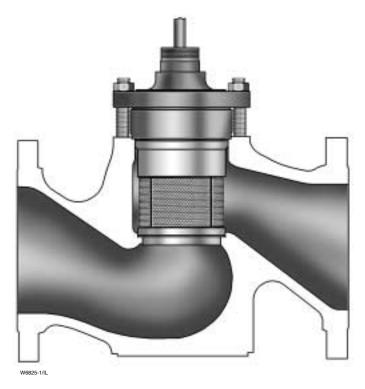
Cutaway Detail of the WhisperFlo® Trim, Valve Body Typical
